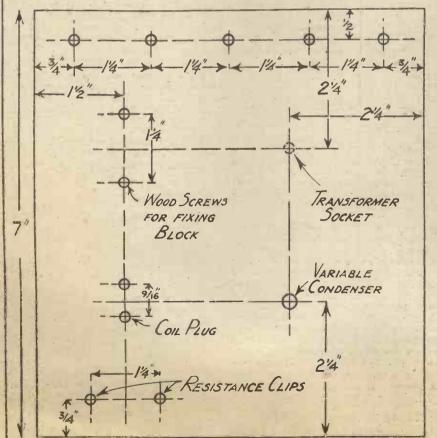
DRILLING LAYOUT (FRONT OF PANEL)
